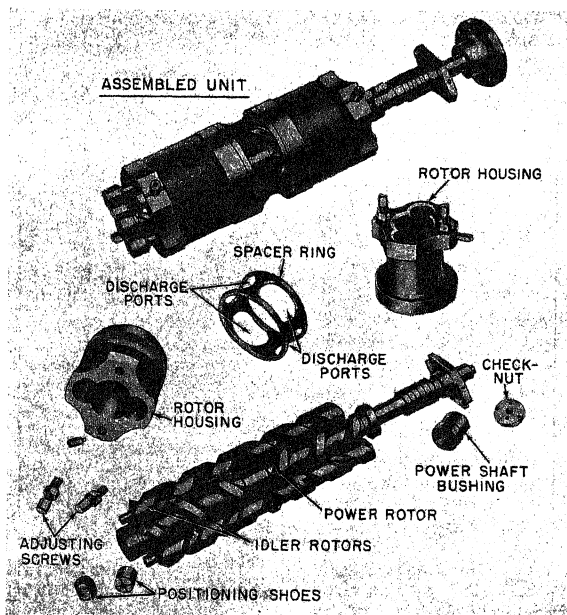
Rotor assembly for a lube-oil service pump.
